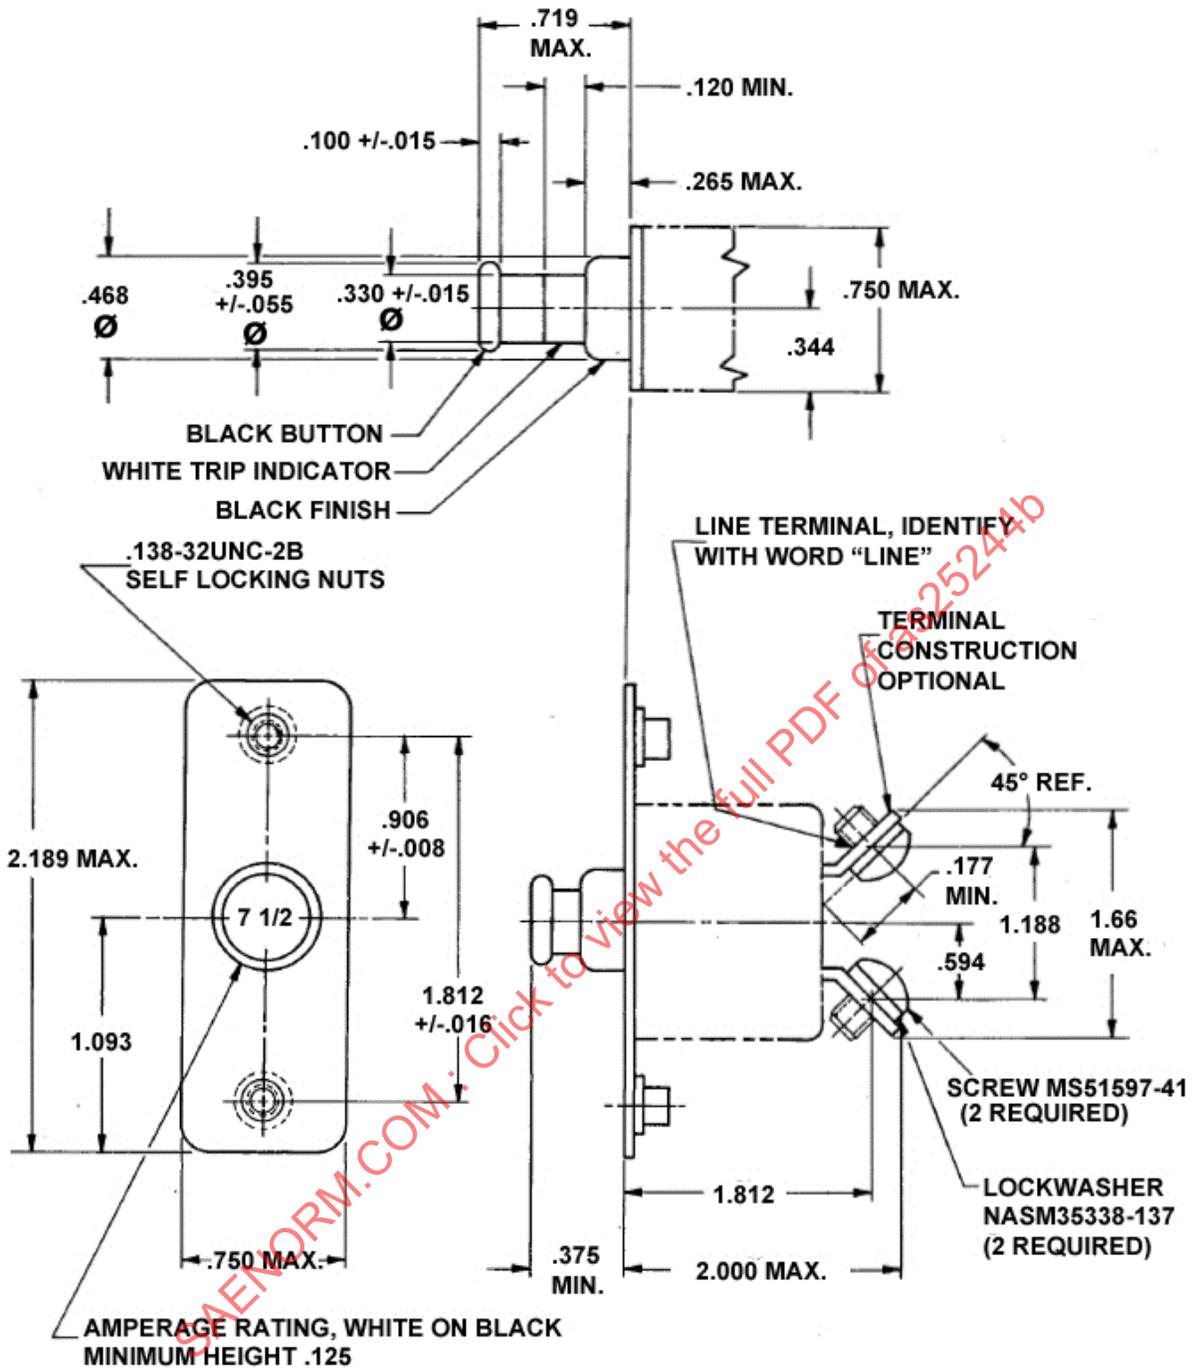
CIRCUIT BREAKER CONFIGURATION AND DIMENSIONS
